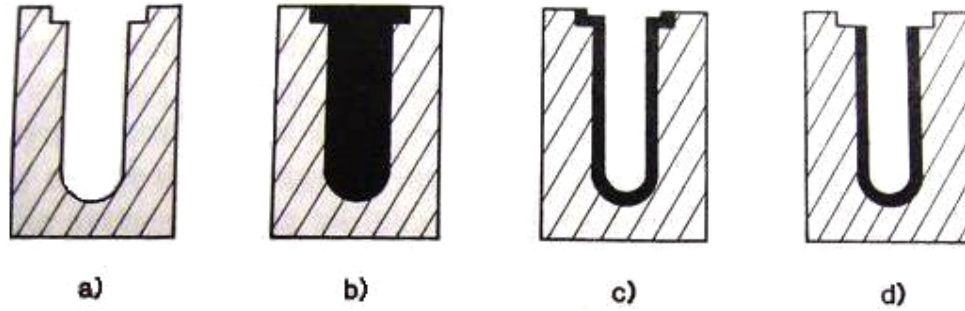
Processing flow diagram for basic slip casting process: (a) a porous mould is (b) filled with slurry; (c) superfluous slip is poured out when the desired wall thickness has been achieved and (d) shows the final dried product ready to remove from the mould.
